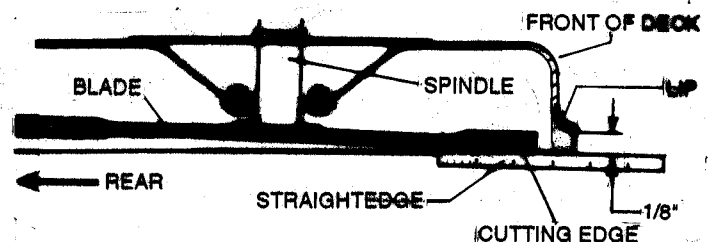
BLADE TO FRONT LIP MEASUREMENT
